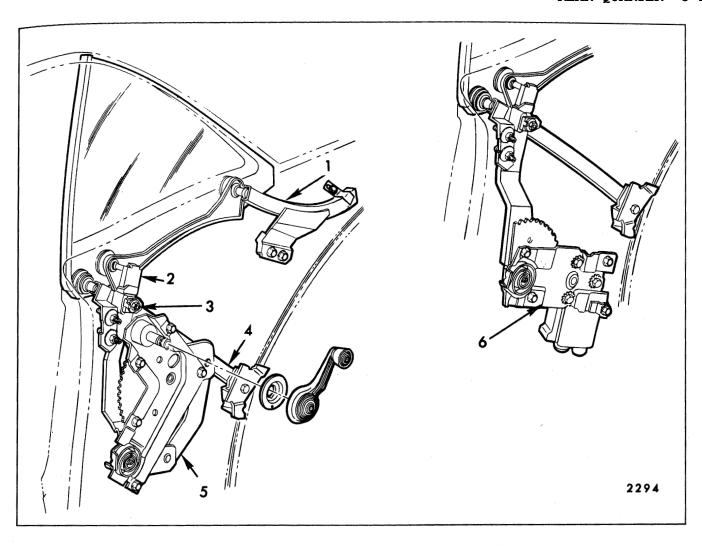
Rear Quarter Hardware - Oldsmobile "E" Body
